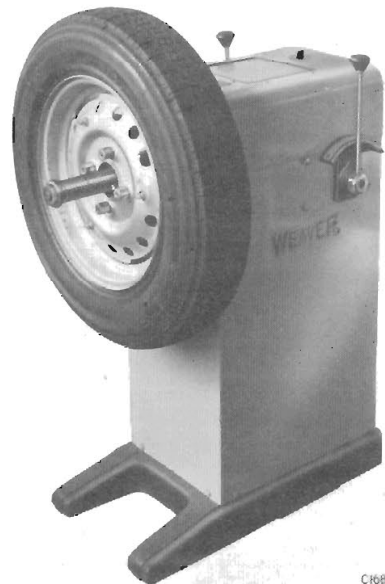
Checking the dynamic balance of road wheel and tyre assembly
